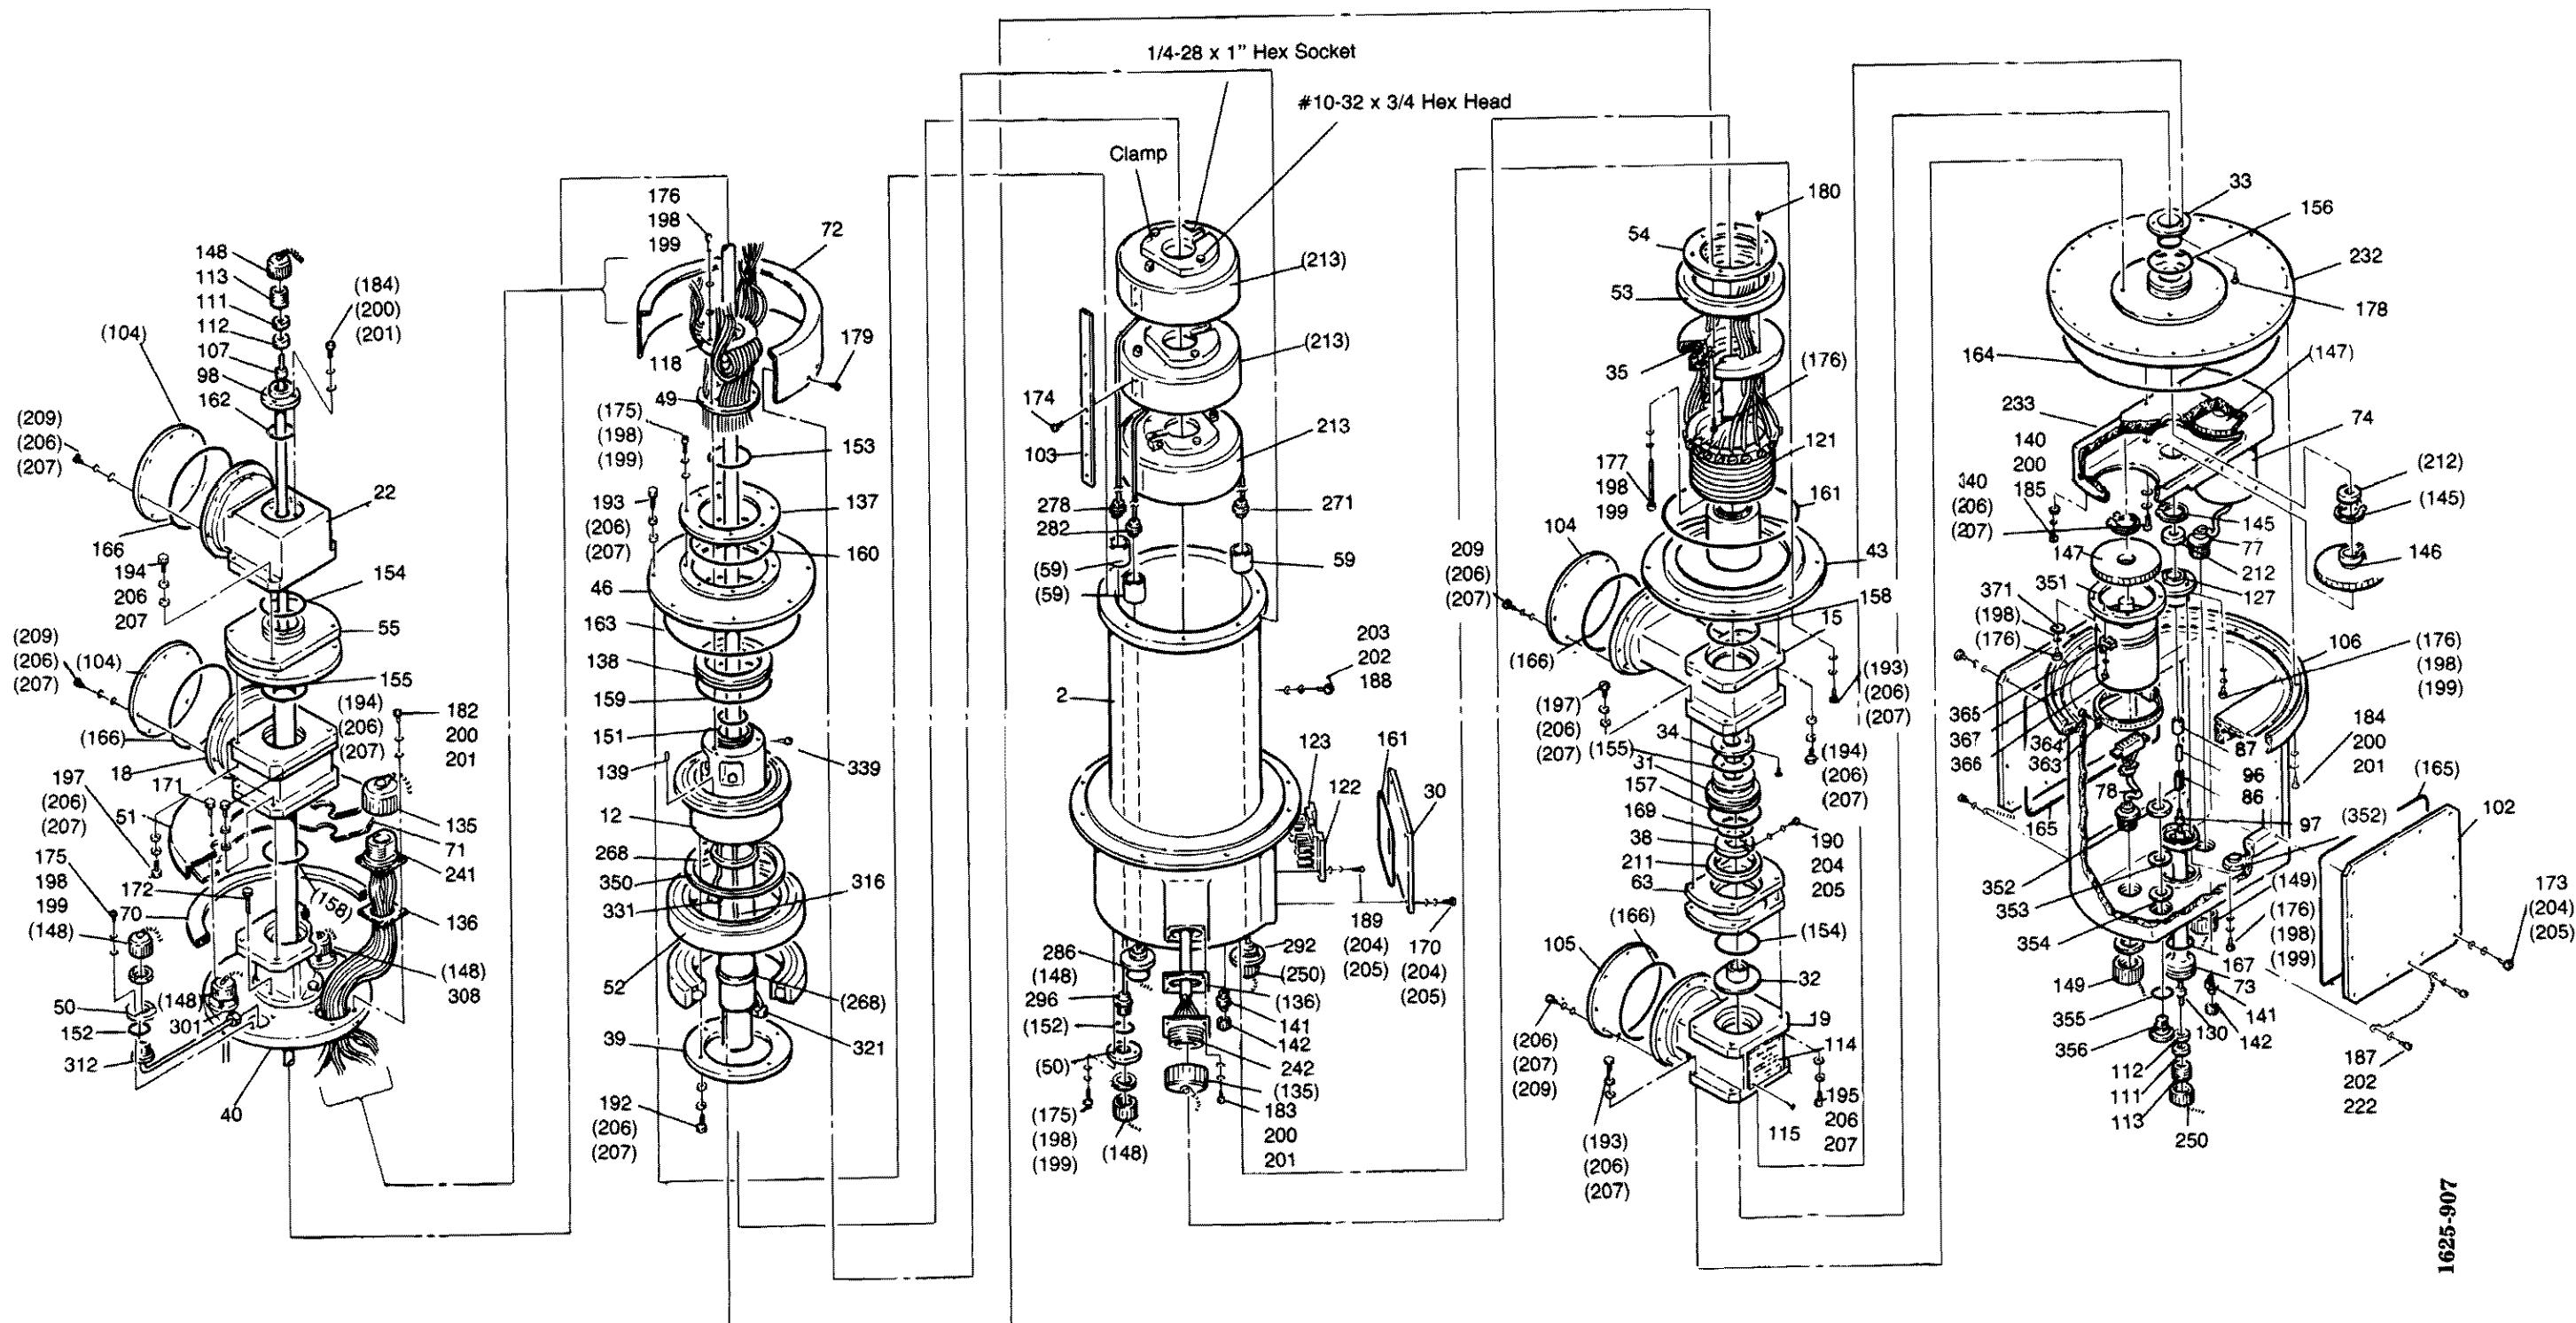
CROSS SECTIONAL ASSEMBLY
